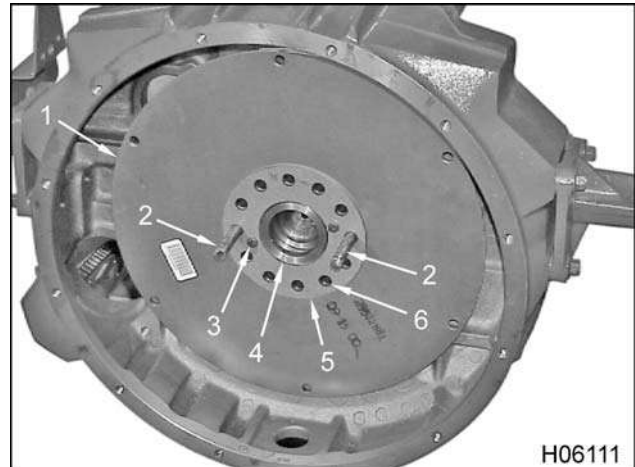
Removing flexplate (MD-3000 and HD-4000 Series Transmissions)
